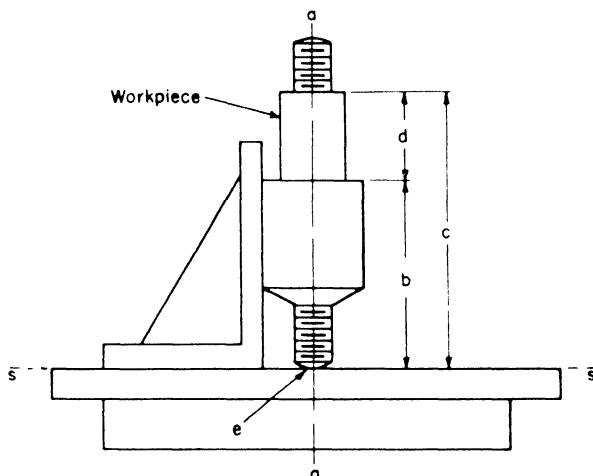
Dimension d of the work-piece is obtained by measuring the distances b and c with respect to the surface plate and then subtracting b from c .
